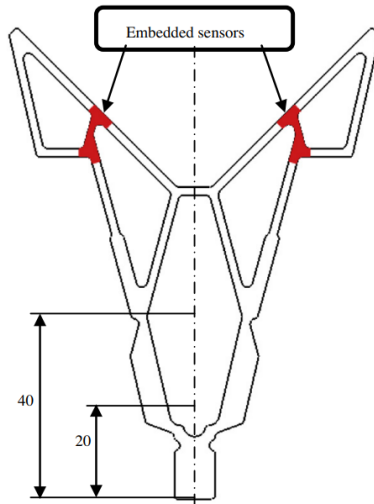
Gripper design with embedded sensors and desired input displacements.
